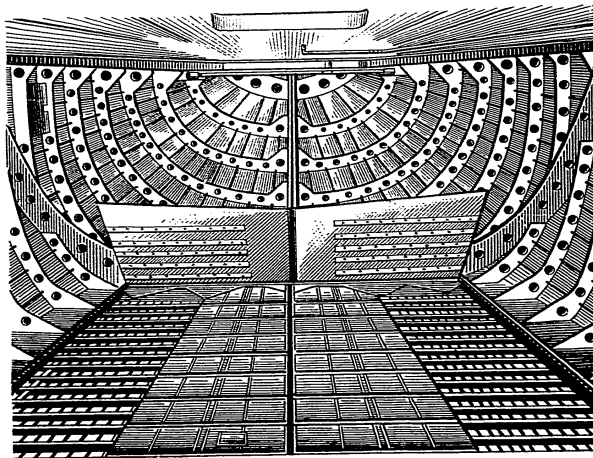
CARGO COMPARTMENT DOOR PANELS AND RAMPS IN CLOSED POSITION
